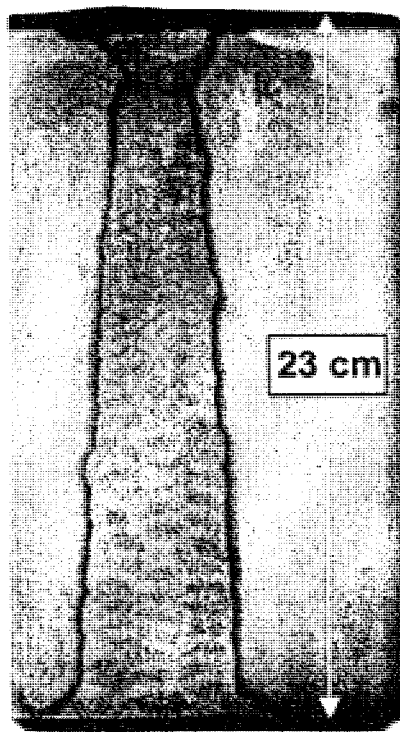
Weld Cross Section for Beltline (Lower-to-Intermediate Shell) Weld
